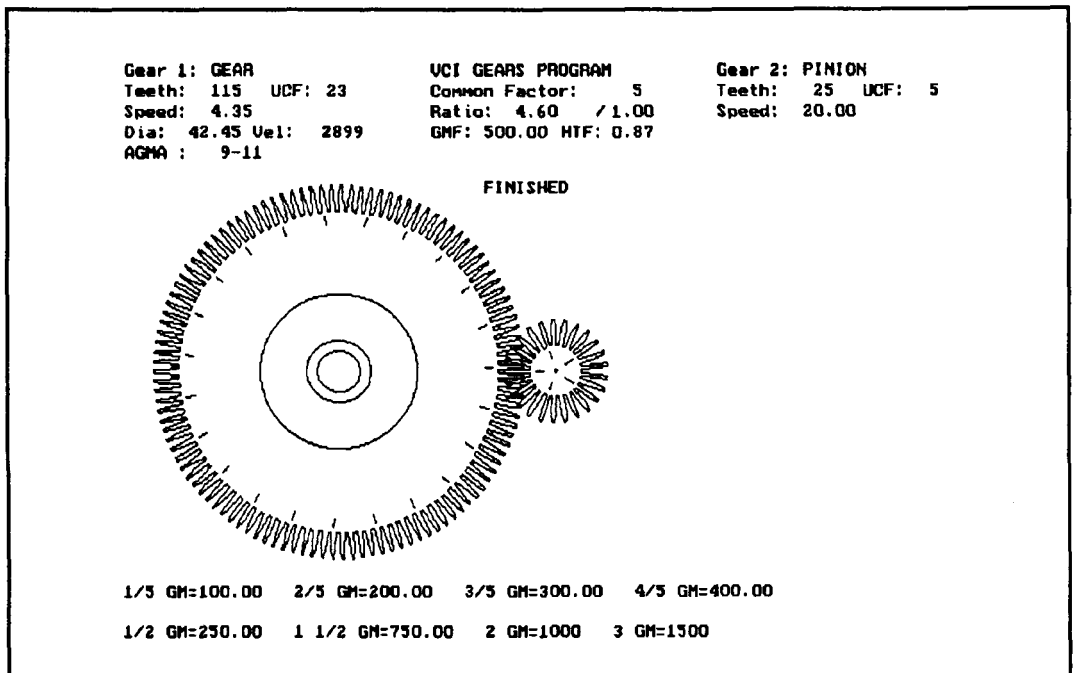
Gears Program Output of 25-Tooth Pinion and 115-Tooth Gear.
